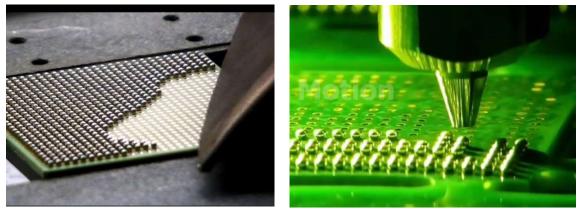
BGA reballing via custom fixture (left), and fixture-less 0.4mm pitch laser BGA reballing (right)
